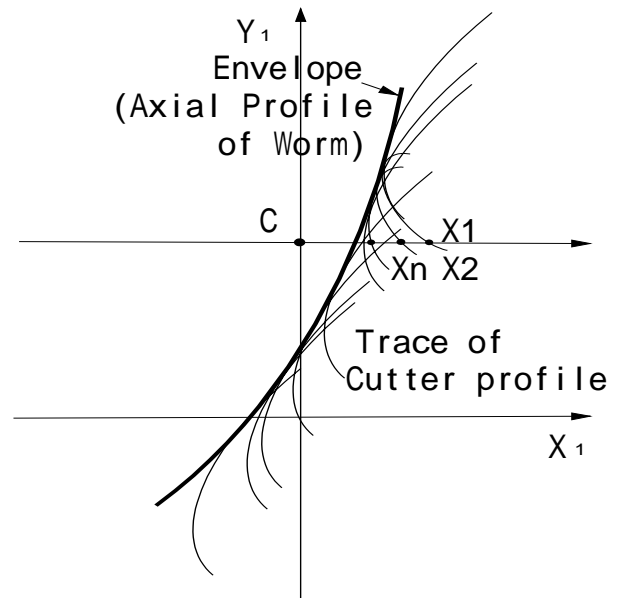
Enveloping of the Section of Worm Tooth by the Tooth surface of Involute Helical Gear
